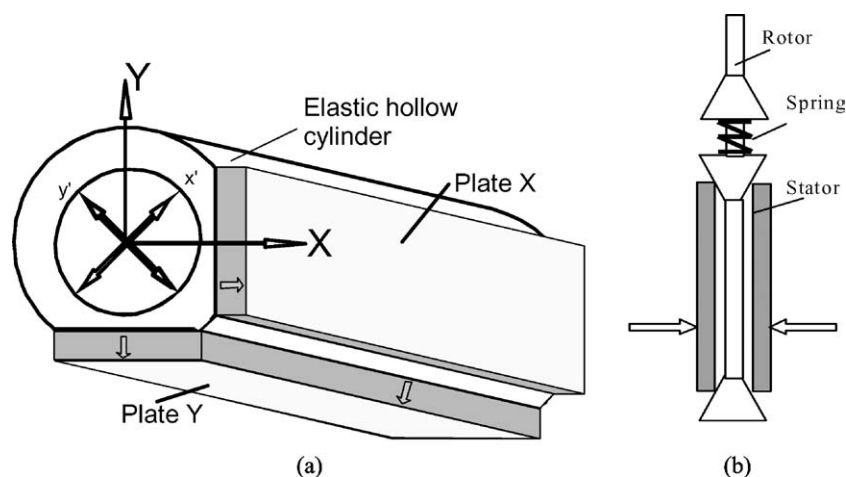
(a) Structure of a metal tube stator, and (b) assembly of the motor.
